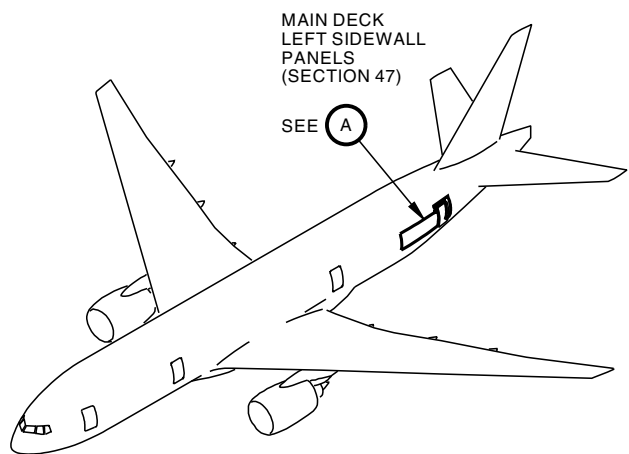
ZONE 241 PASSENGER SIDEWALL PANELS
